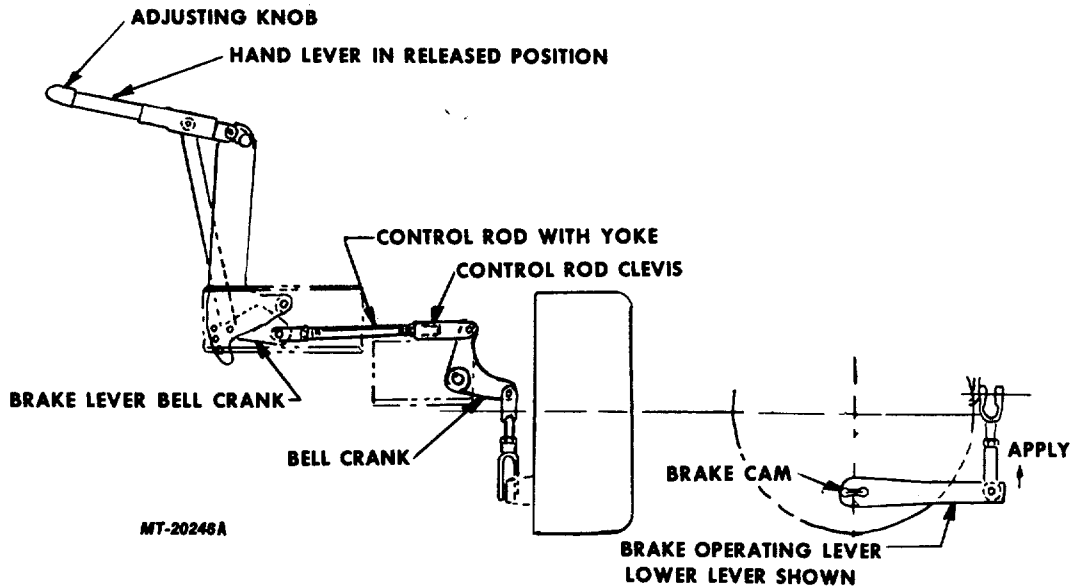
Parking Brake Adjustment in the Orscheln Hand Lever
